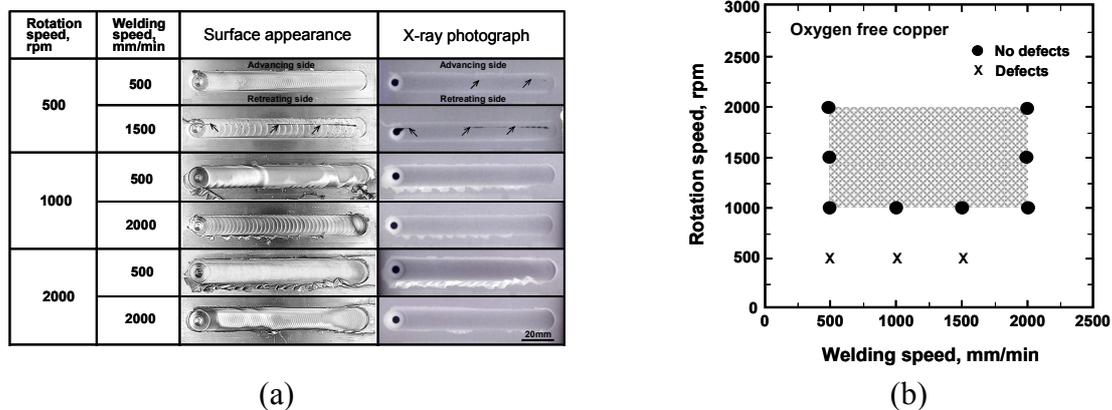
Surface appearances and X-ray radiographs of welds (a), and optimum FSW conditions for sound welds (b) of OFC
